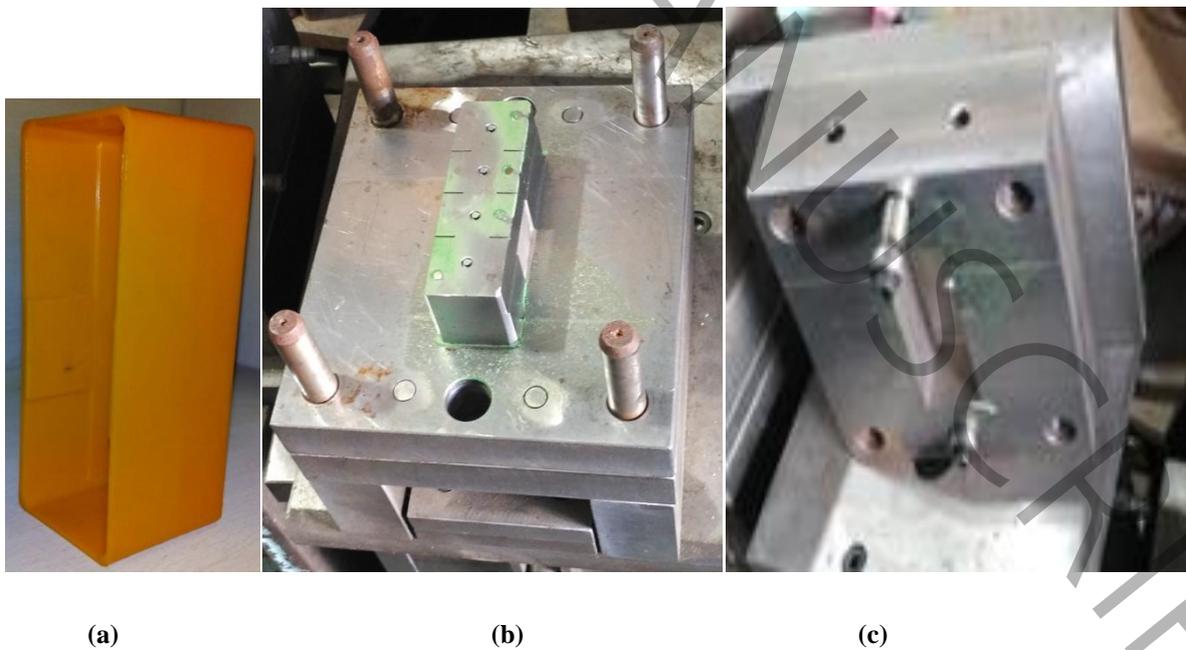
(a) Enclosure part, (b) core plate, (c) cavity plate available in the industry
